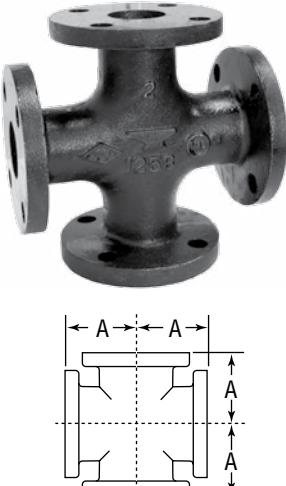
Flanged Cross	Size	A		AA		Flange Diameter	Thickness		Unit Weight
